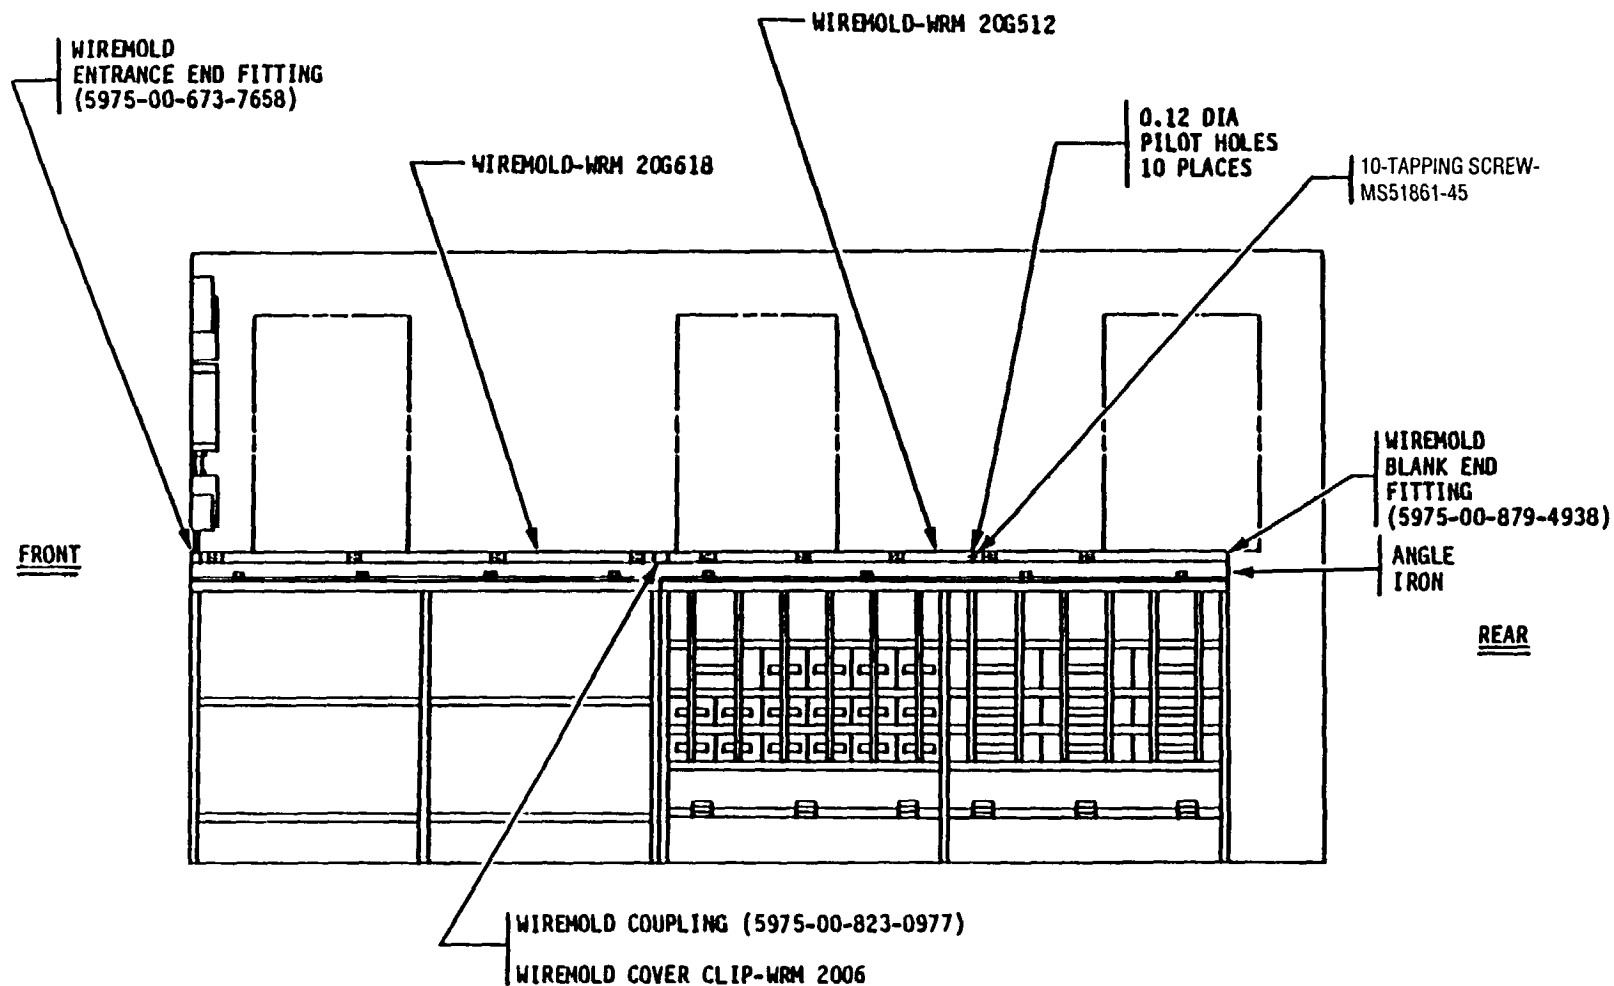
Wiremold Installation, Right Side Wall, M109A3.
